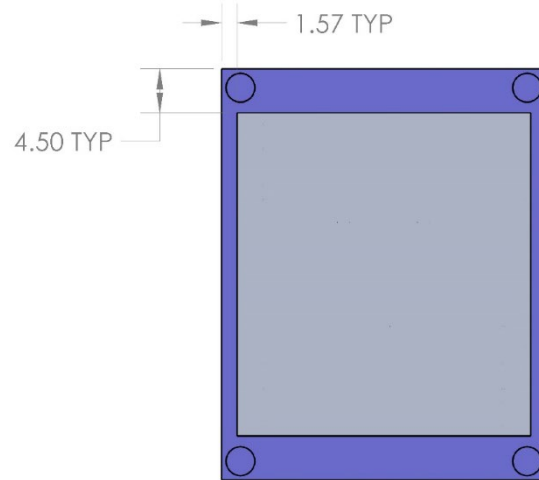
Plate should be symmetrically aligned with instrument; dimensions are given as a reference to check once placed.
